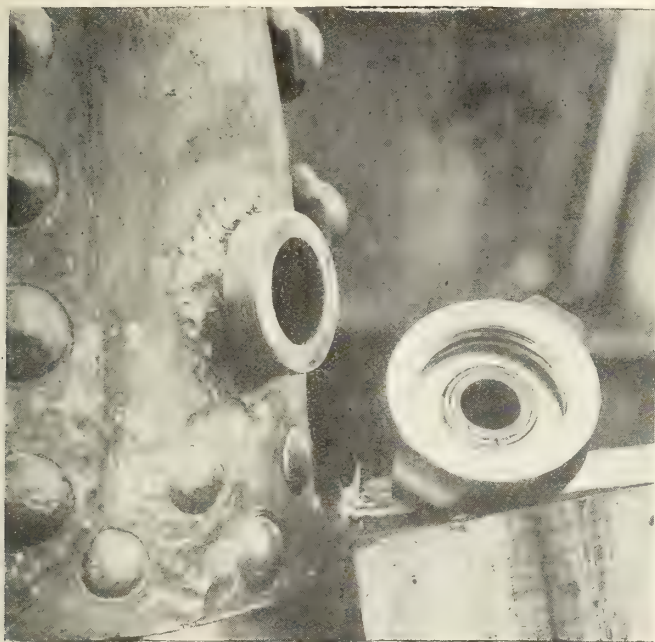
IMPROVED WASHOUT PLUG FOR LOCOMOTIVE BOILERS. IT IS WELDED INTO POSITION.
